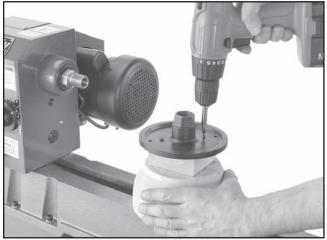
Attaching the faceplate to a backing block, which is glued to the workpiece.
